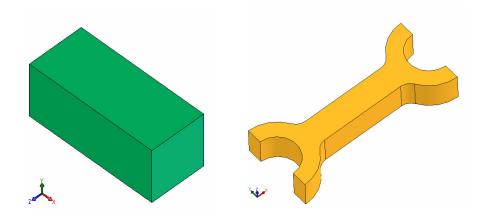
Example parts for Category I(b)(left), Category I(c)(right)
